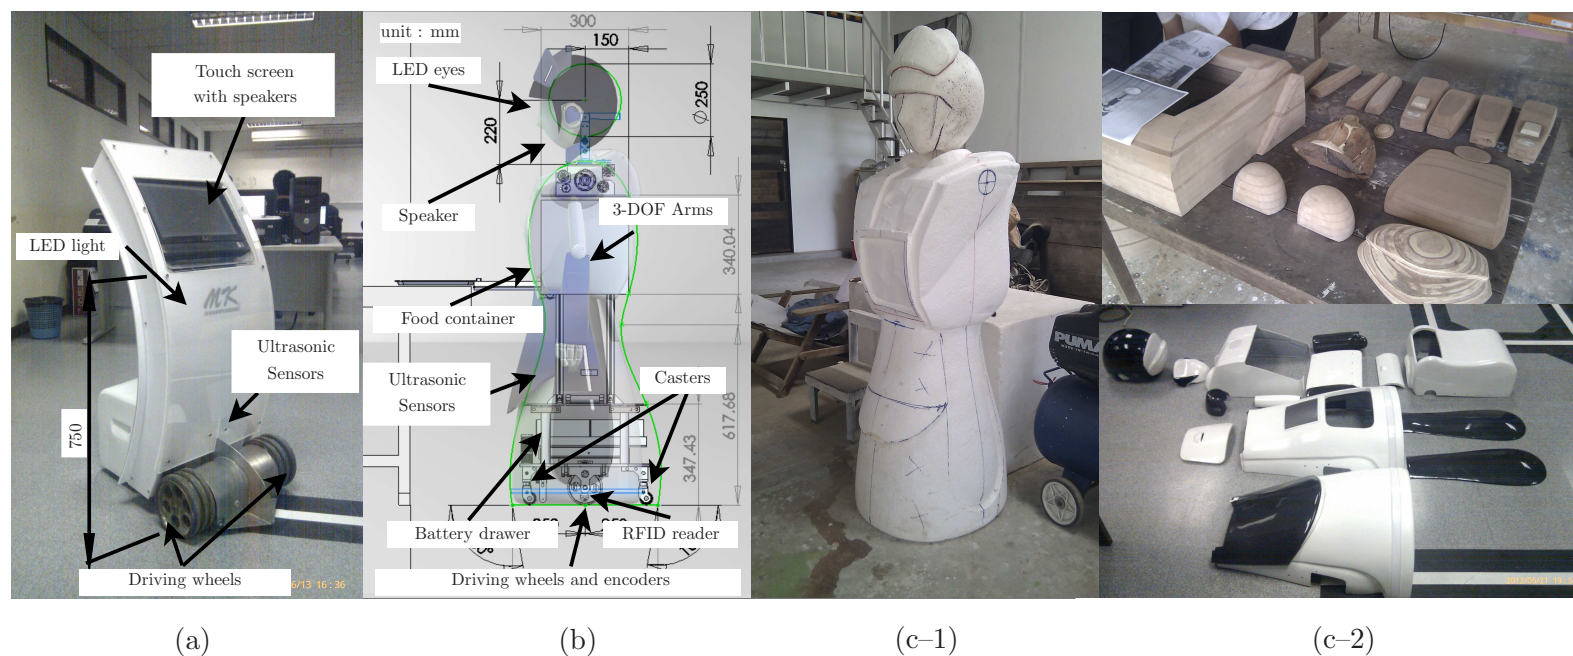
Embodiment design: (a) Order robot, (b) Server robot. Note robot dimension is in Table 3.1. Handmade skin production: (c-1) Full scale modeling by foam board, (c-2) The foam board is cut into small pieces and Molds are made by using a polywood layering and make ABS plastic Thermoforming.
